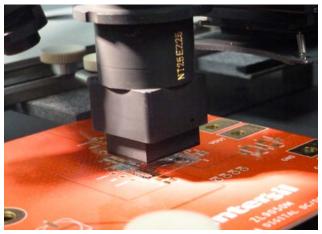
COMPONENT REMOVED WITH VACUUM PICK-UP
